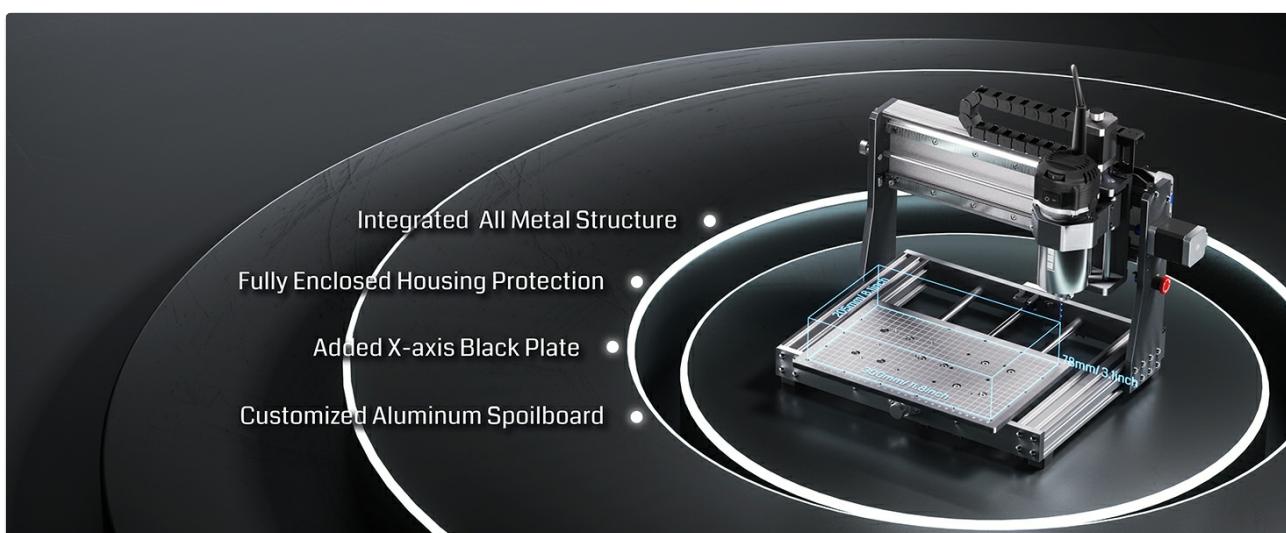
Diagram highlighting the integrated all-metal structure, fully enclosed housing protection, added X-axis black plate, and customized aluminum spoilboard.
